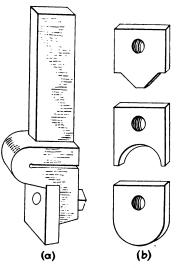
(a) Spring tool holder and square nose tool. (b) types of tools.
